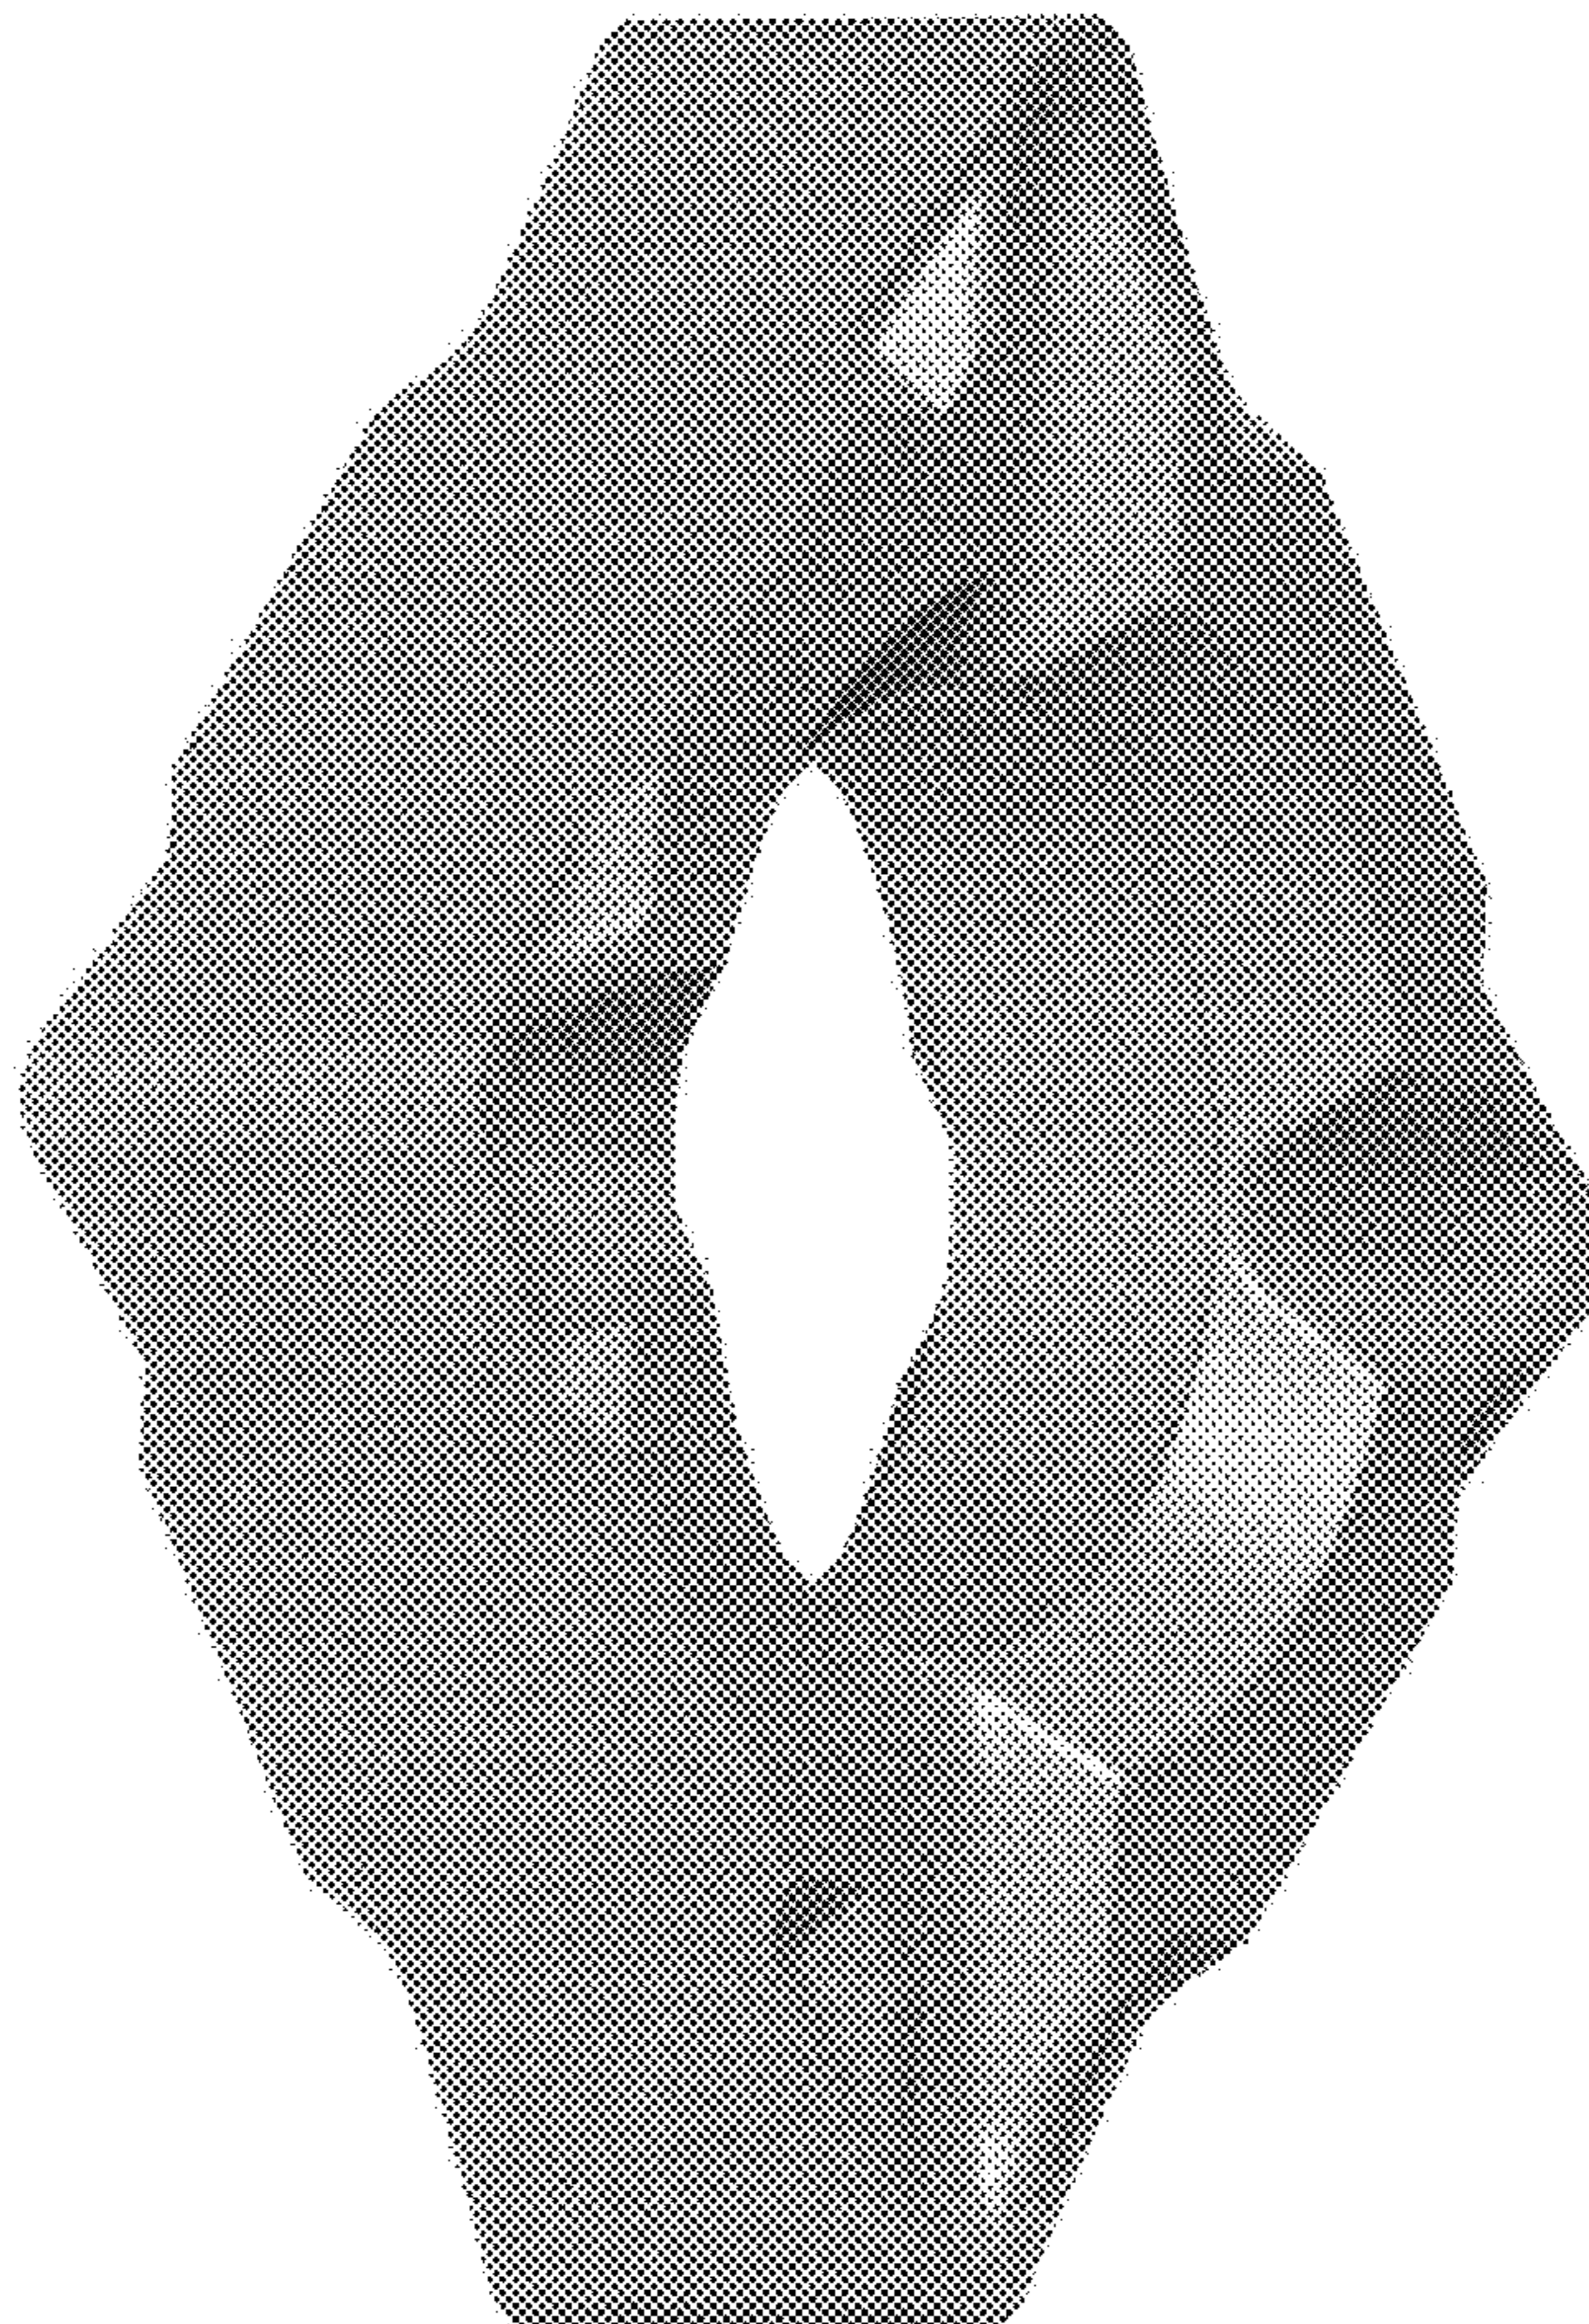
is a side view of the cutting insert of FIG. 1 taken at one position.
